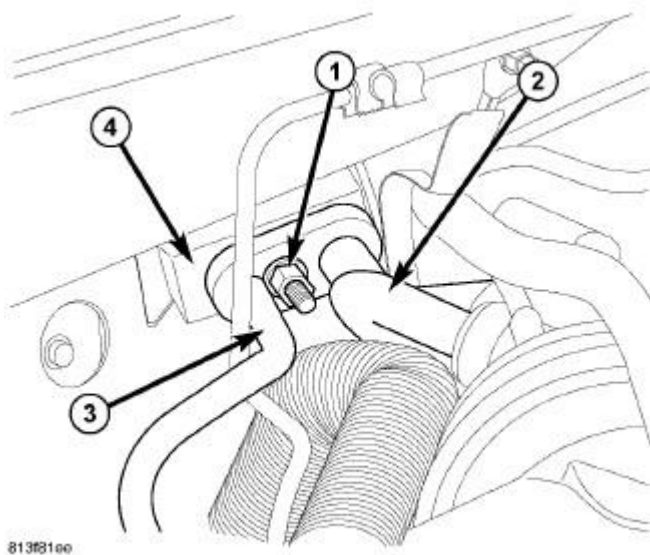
A/C EXPANSION VALVE LINES - REMOVAL & INSTALLATION
